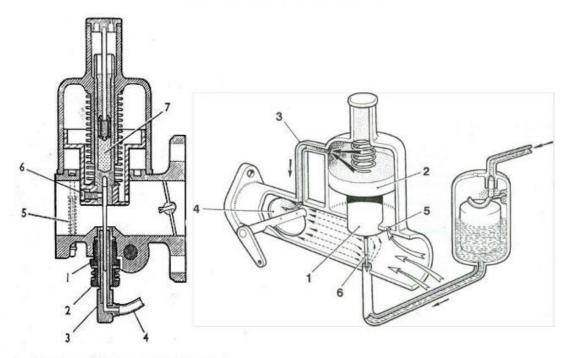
SECTION VIEW OF THE HS4 CARBURETTER.
